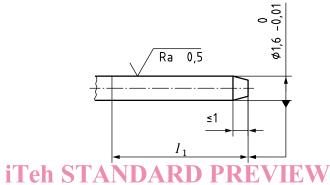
Dimensions, tolerances and surface roughness for Type 3 shank (Standards.iteh.al)
